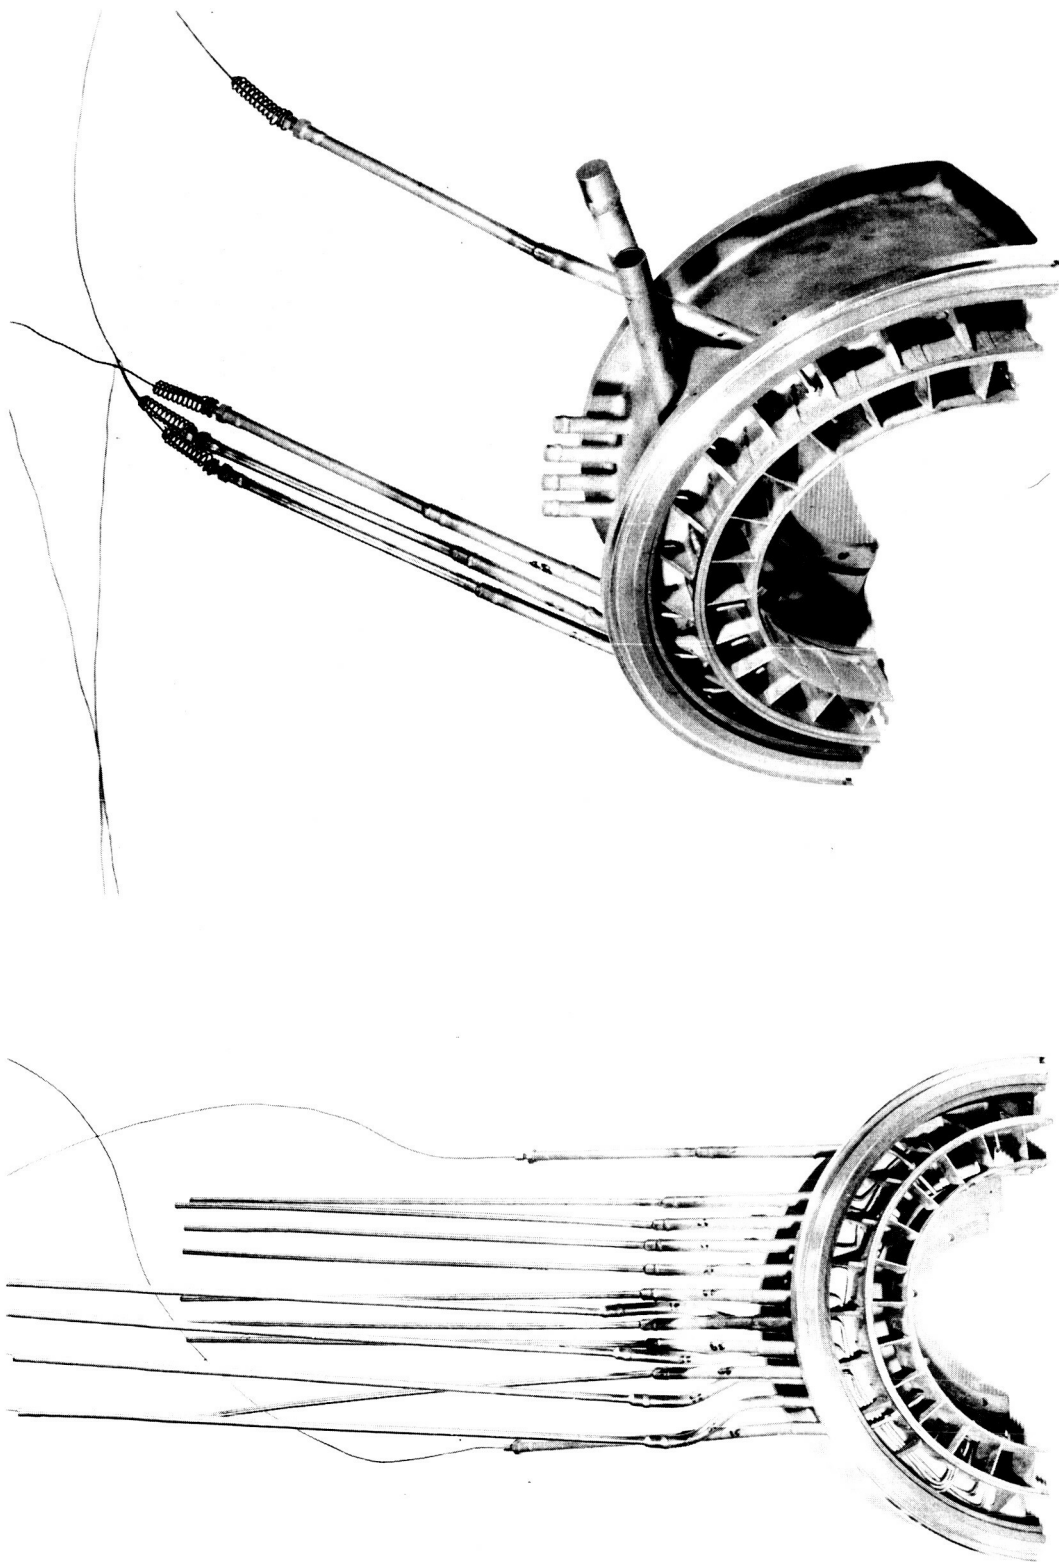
Re-instrumented Turbine Casing Prior to Final Assembly.
